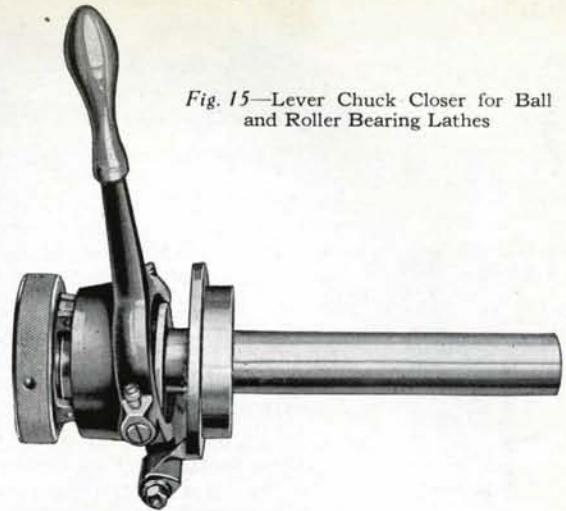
Lever Chuck Closer for Ball and Roller Bearing Lathes
